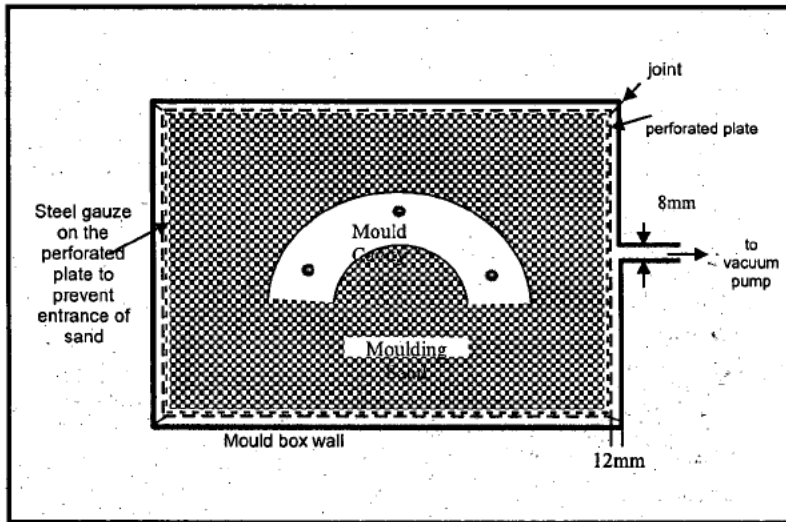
Specially designed double lined moulding box used for imposing vacuum ('depression') [1, 24].
